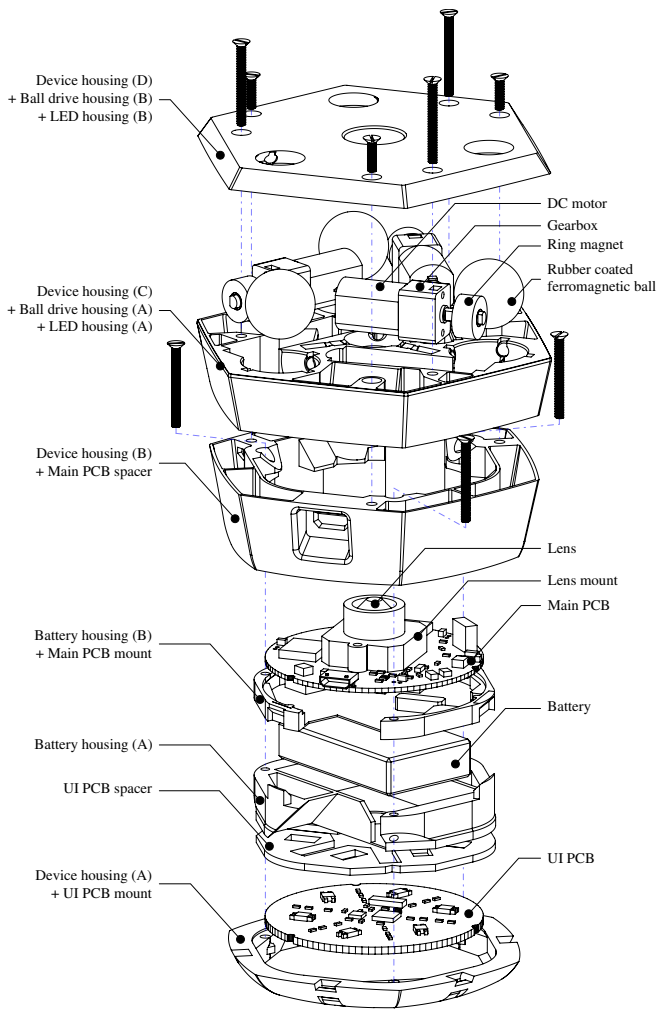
Exploded view of the Cellulo robot, upside-down. Screw routes shown in dashed blue. LEDs, LED cables, motor cables, battery cables and PCB interconnect cable not shown.
